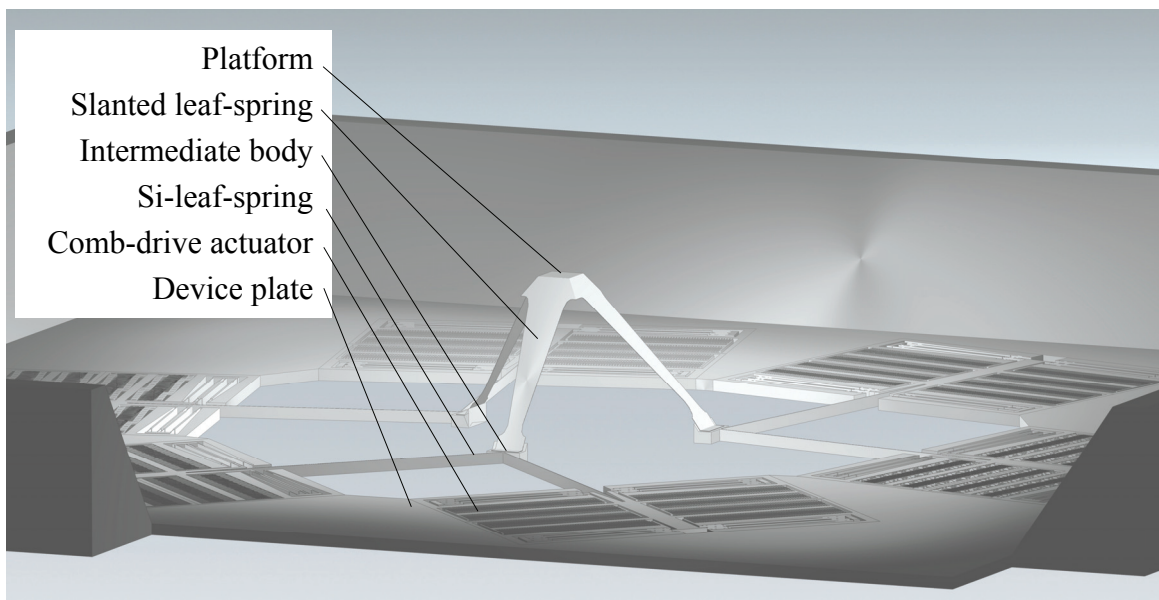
3D-view of the slanted leaf-spring concept. For viewing purposes part of the side has been removed.
